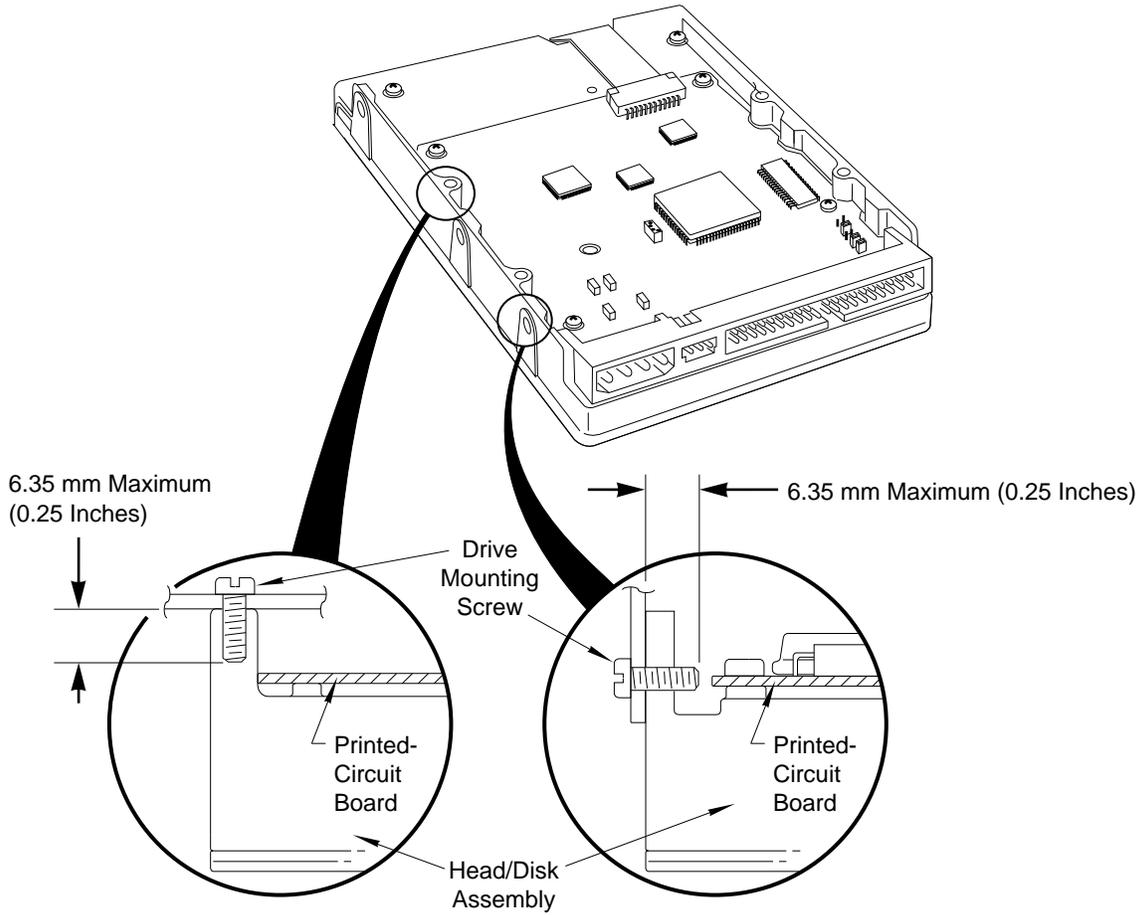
Mounting Screw Clearance for Quantum Fireball TM (Two- and Three-Disk) Drives
